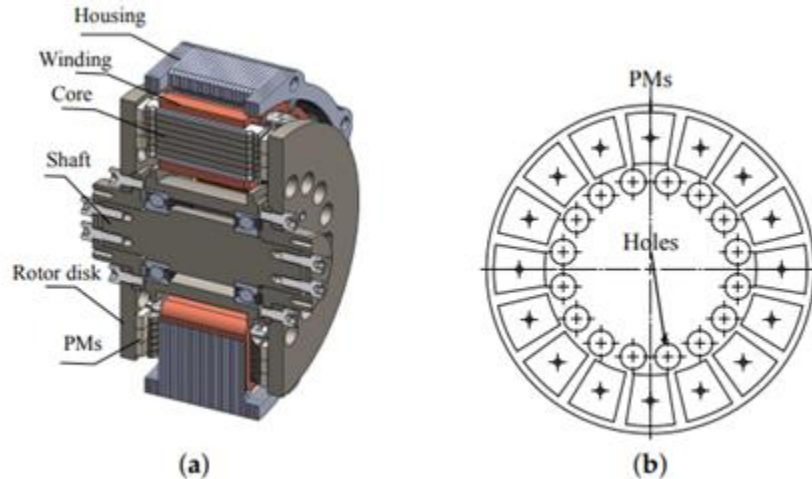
Prototype and rotor structure; a) Prototype cross section, b) Rotor geometry, [29]
